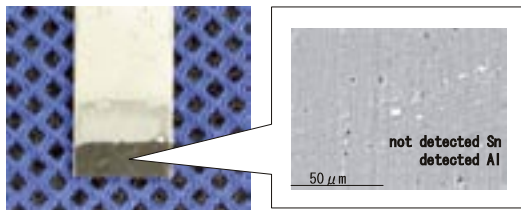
Surface appearance of Sn plated Al sheet after flow soldering
